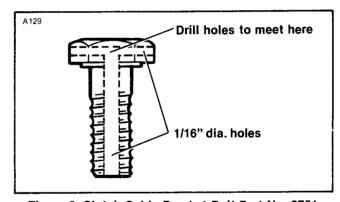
Clutch Cable Bracket Bolt Part No. 3751
